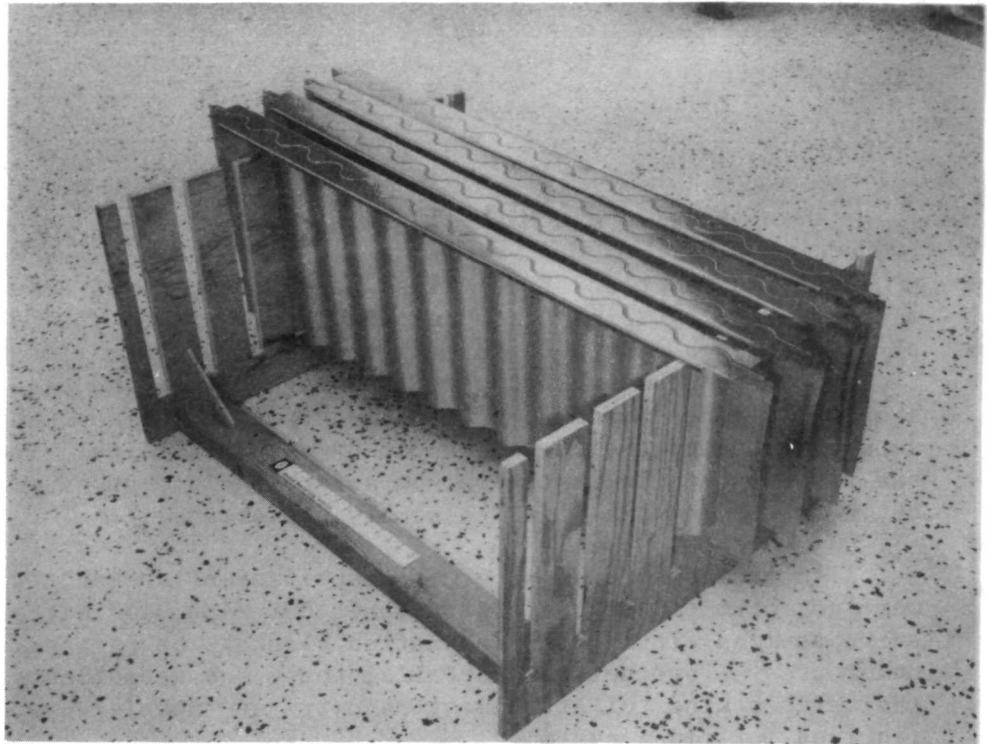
Set of Cap and Web Subassemblies (All common parts were made before changing the weld fixture setup for the joining of the opposite cap.)
